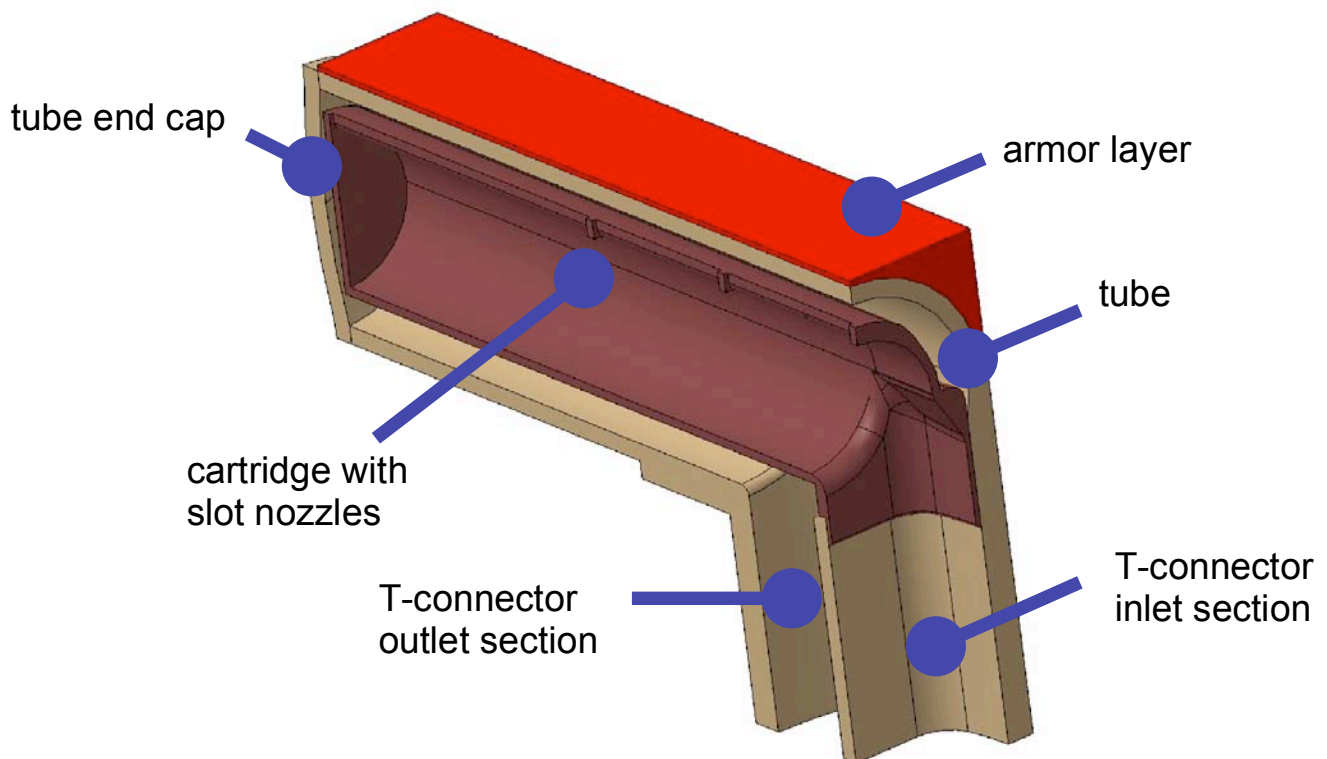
quarter of the CAD model of the T-tube heat exchange part
